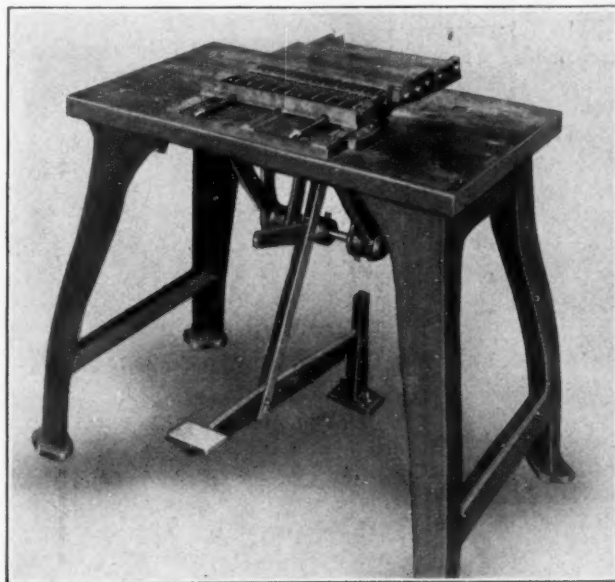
SEMI-AUTOMATIC ASSEMBLING MACHINE, SHOWING METHOD OF INSERTING HARDENED STEEL BEARINGS IN THE BOW LINKS
